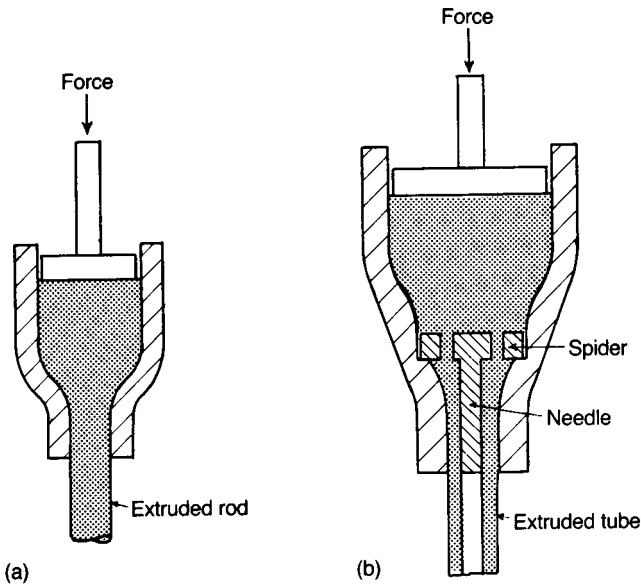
Extrusion of (a) a rod and (b) a tube.
